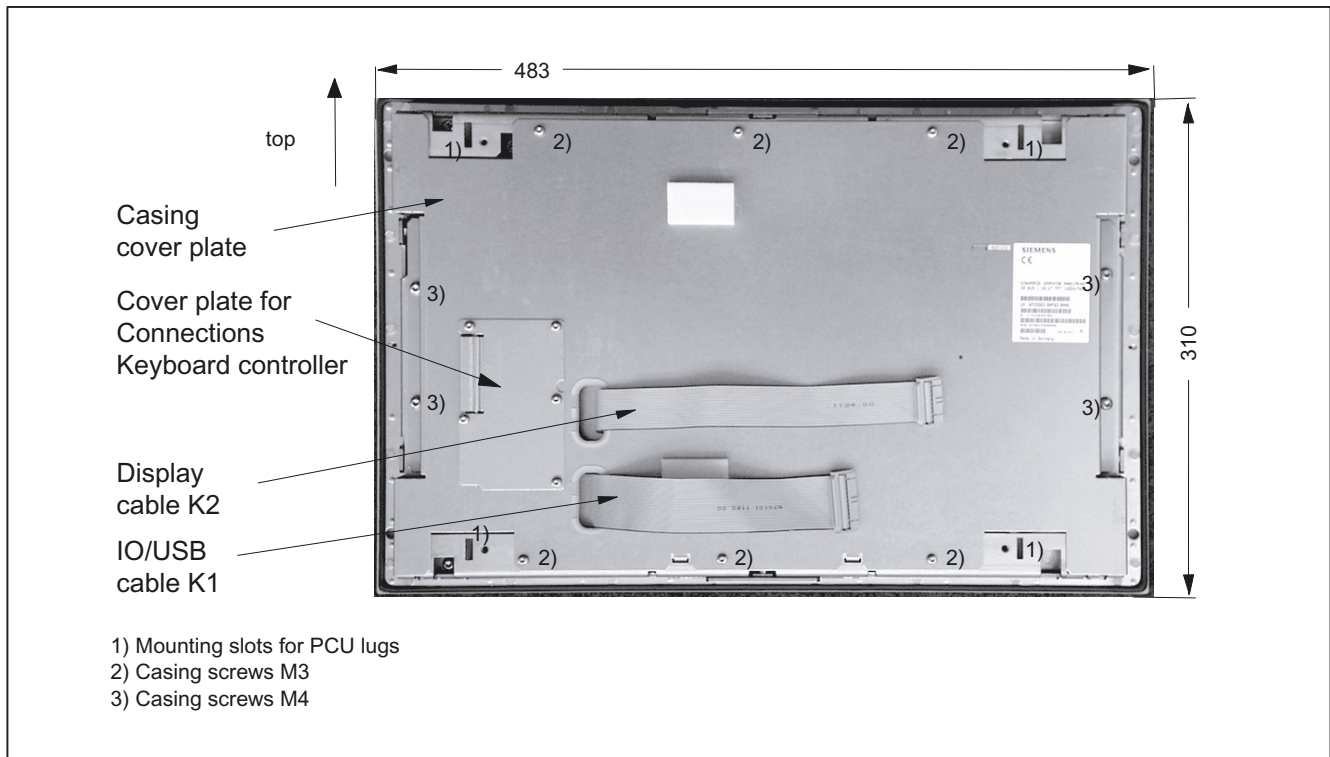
Rear side of operator panel front with position of interfaces and mounting slots
